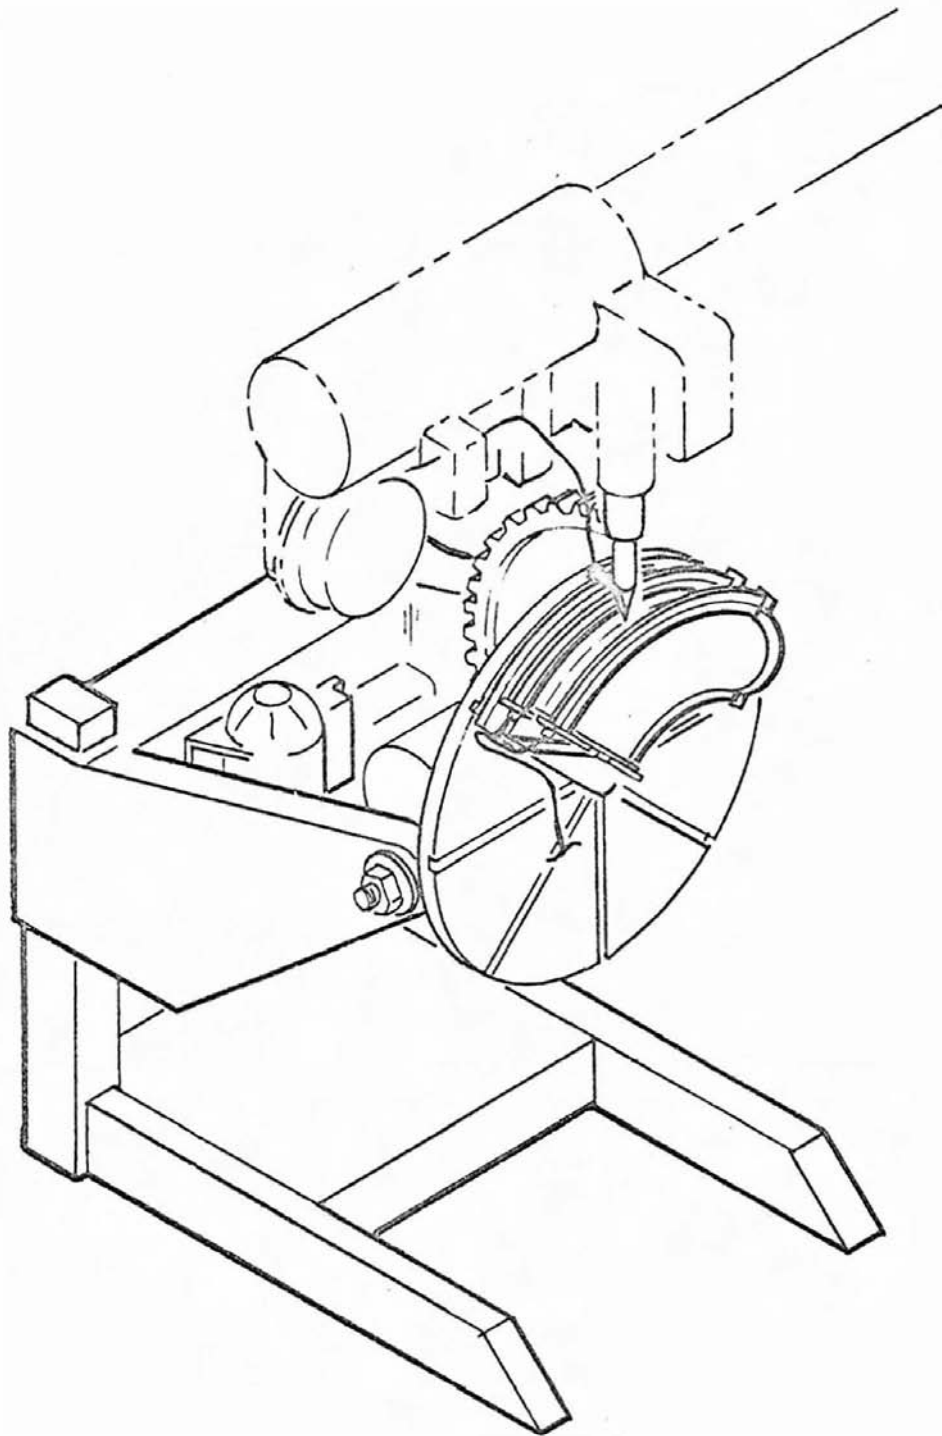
Aft Fuel Fitting Test Weld Fixture
